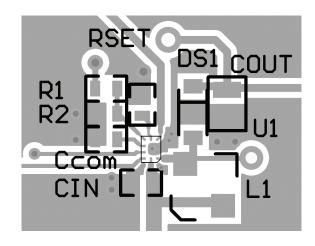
AAT1403 Evaluation Board Top Side Layout (detail).
